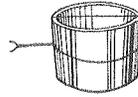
Band Ends, Butted and Held with Crossed Binding Wire
